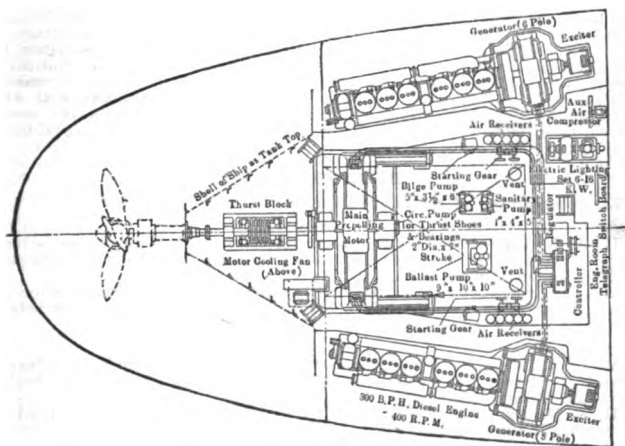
Plan of arrangement of the "Tynemount's" machinery.
